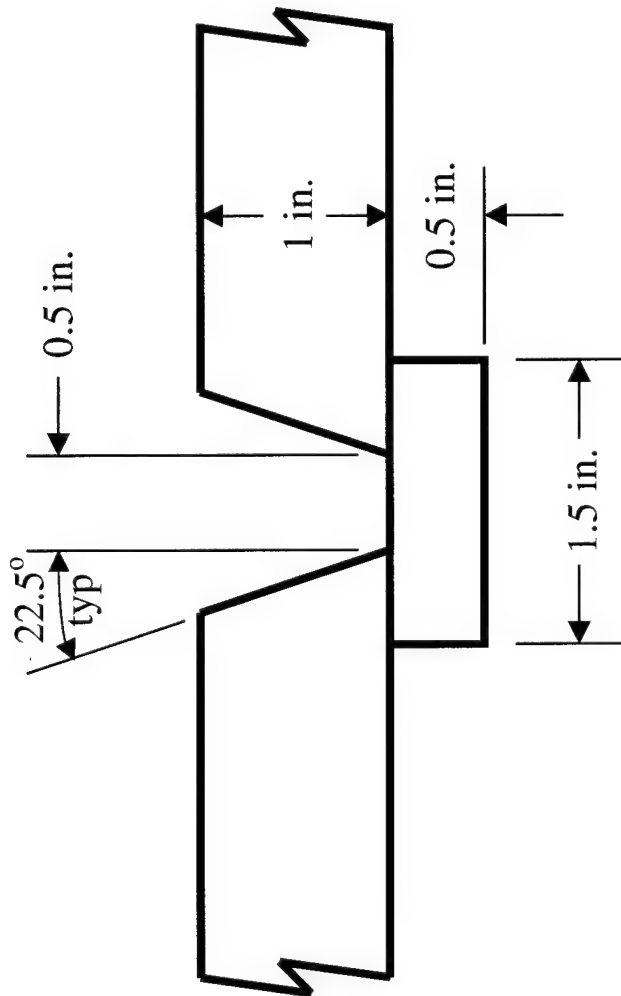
B1V.1 Joint Design Used for Submerged Arc Weldments.
